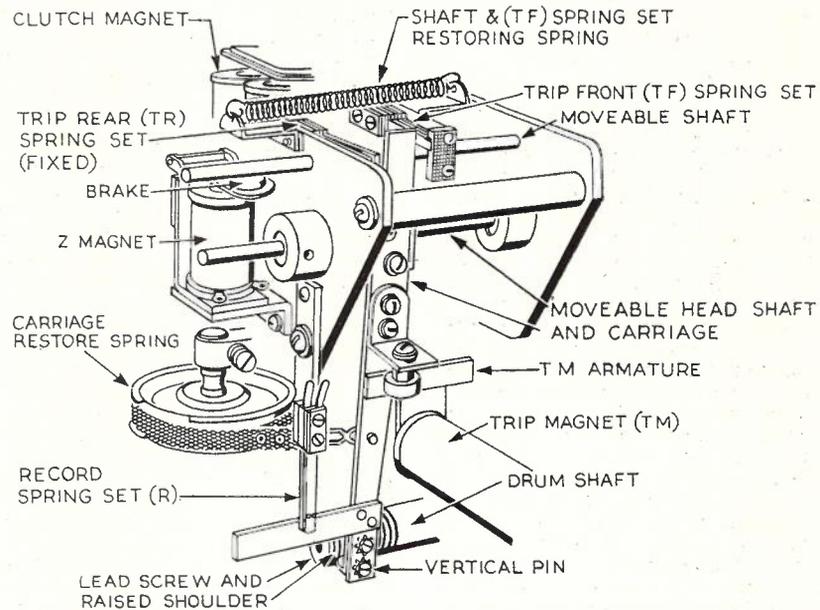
Rear View showing Essential Mechanical Details of Recording Panel.
